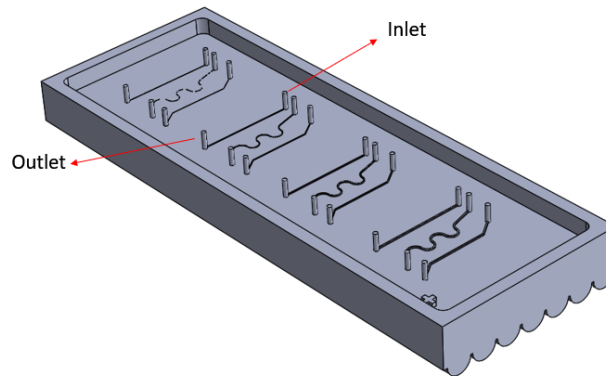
Cad design of the molds; pillars are to open inlets and outlets
